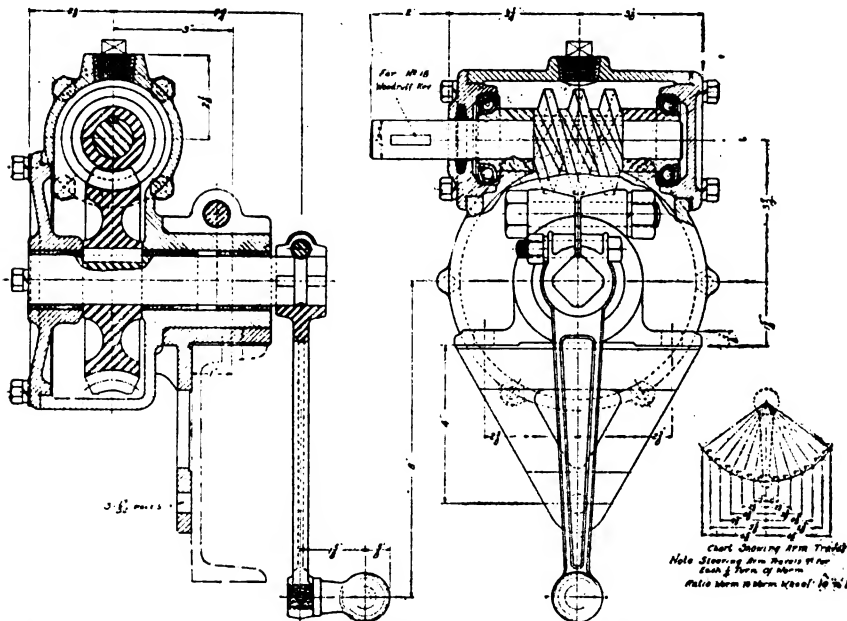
Constructional drawing of Nuttall Tractor Gear, showing meritorious point in the design
